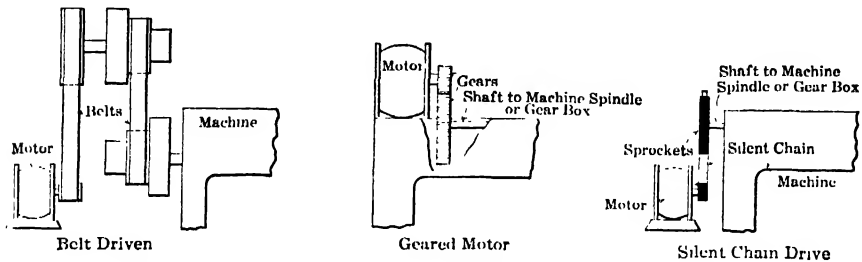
Typical Arrangements of Individual Motor Drive.
